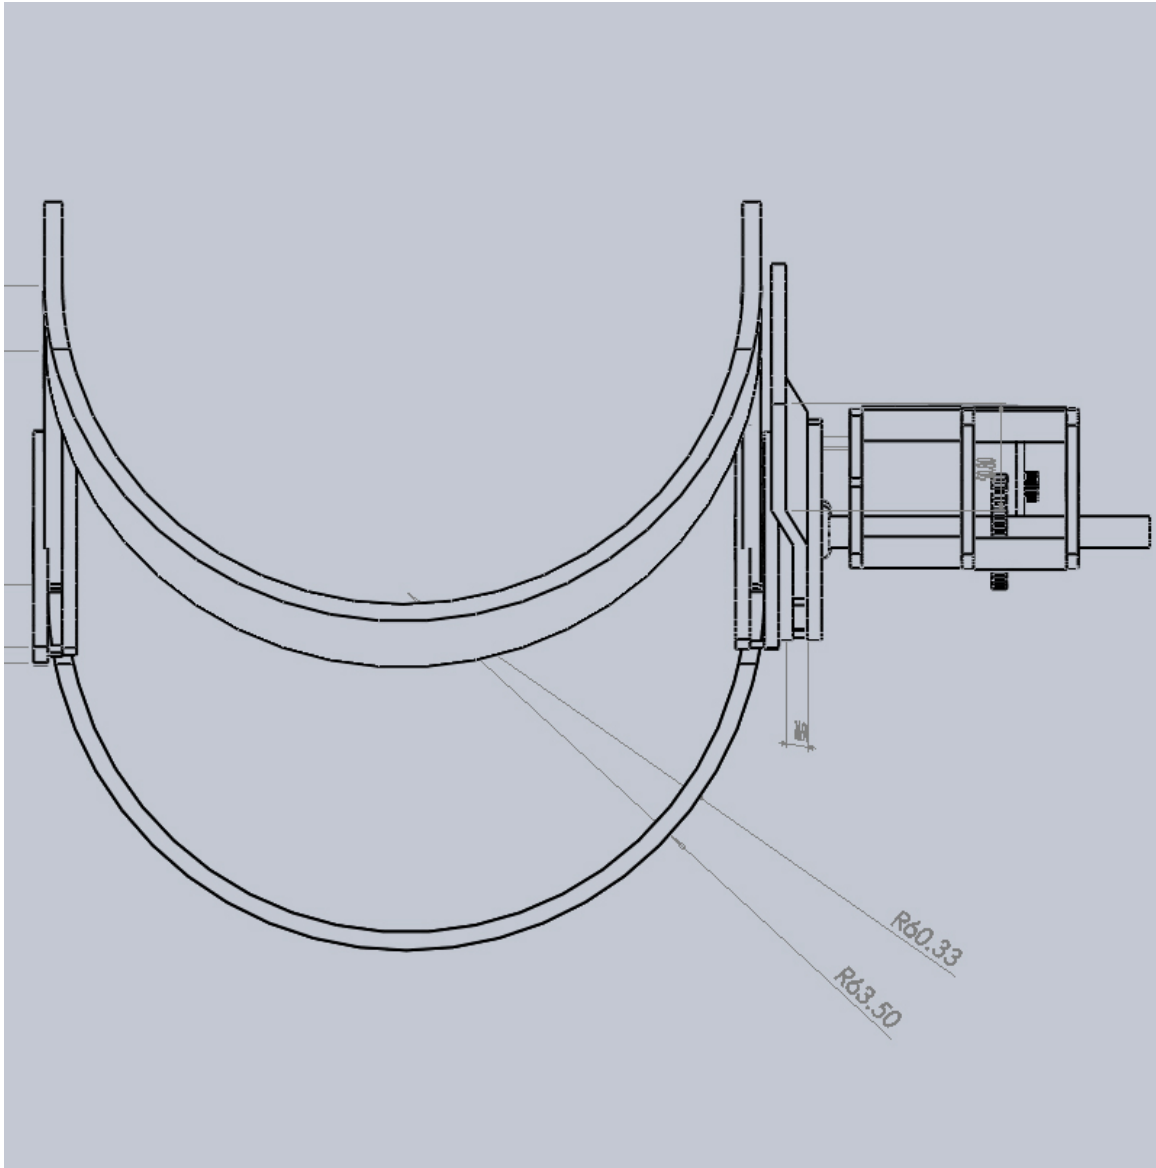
SolidWorks Solid Model Top View of the Knee Brace Assembly
